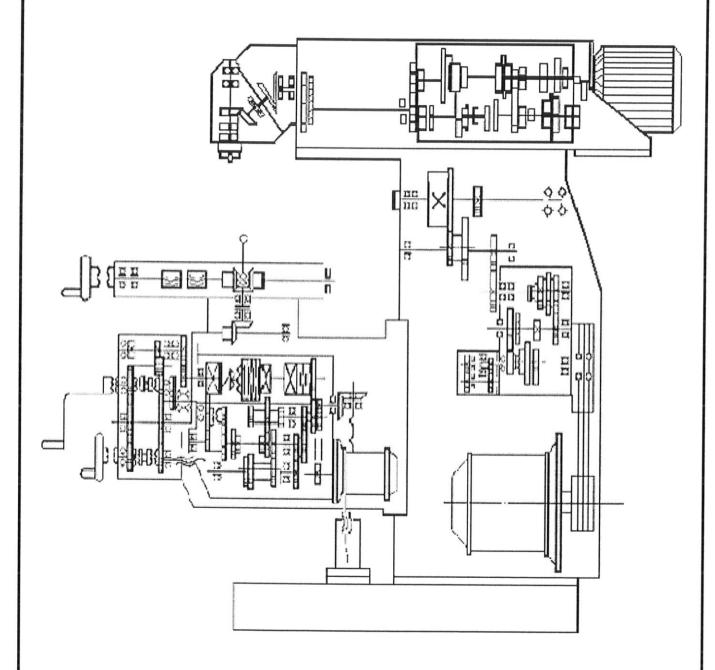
Driving system of Series X6230 Universal Rotary-head Milling Machine
